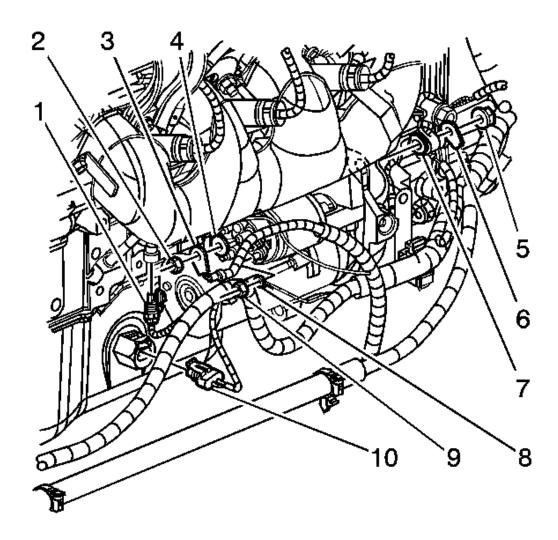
View Of Engine Electrical Connectors (Left Side) Courtesy of GENERAL MOTORS CORP.
